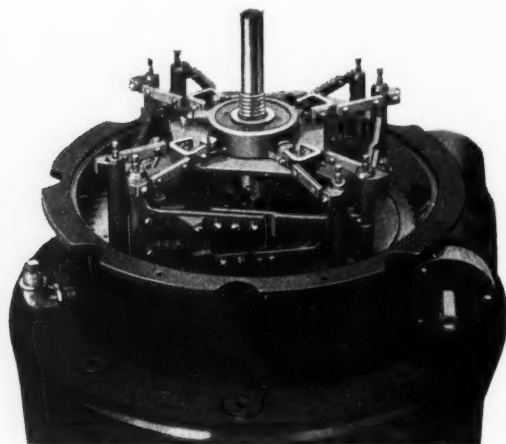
Linkage mechanism and its braces, through which the gear drives the oil cup
